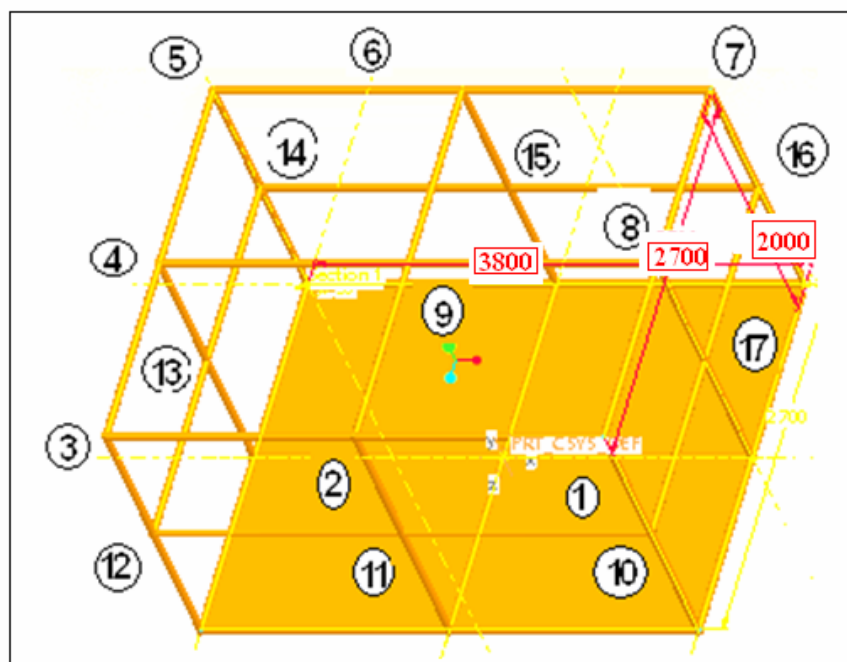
(b) Rectangular Parallelepiped with dimension for Scooters
